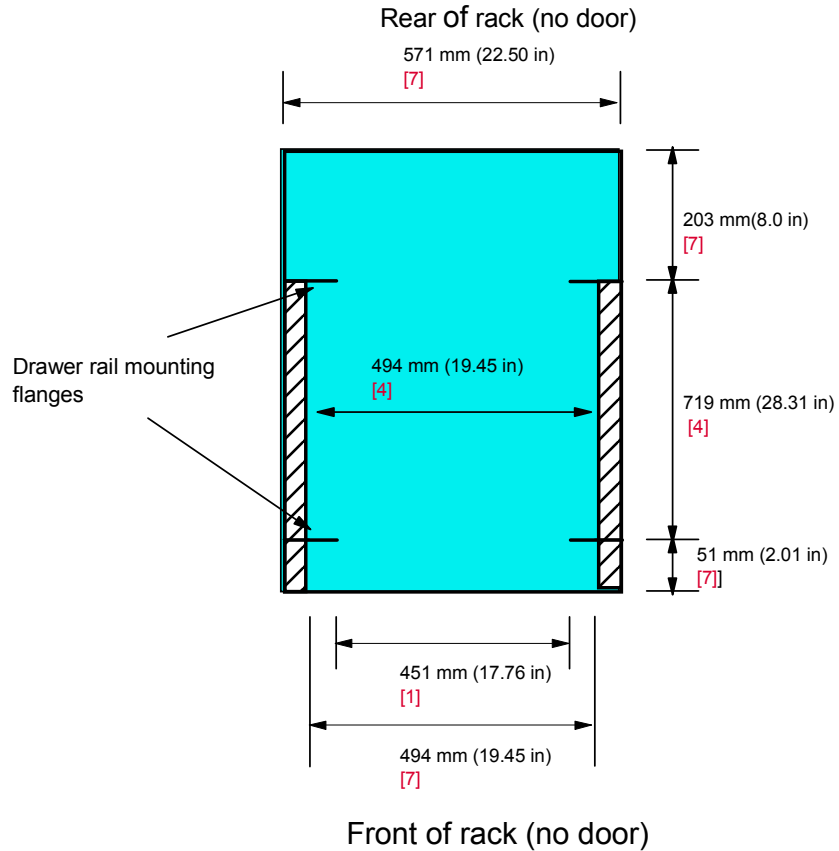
Reference drawing of non-pSeries rack dimensions
